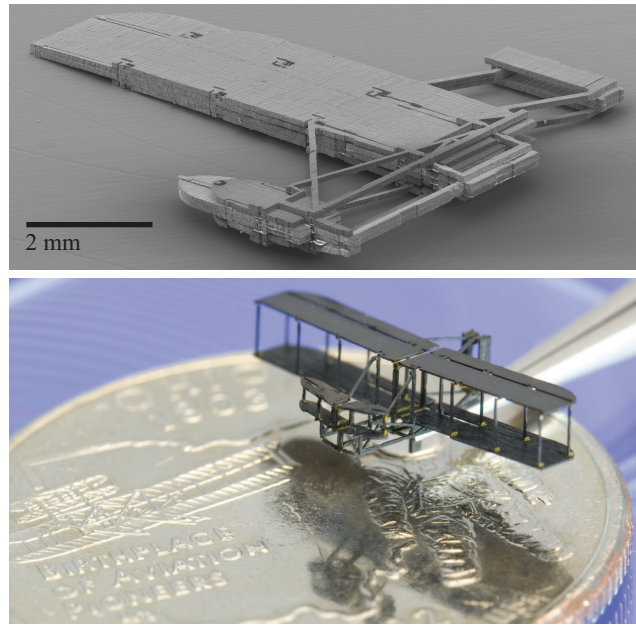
The Wright flyer before (top) and after (bot) pop-up assembly.
